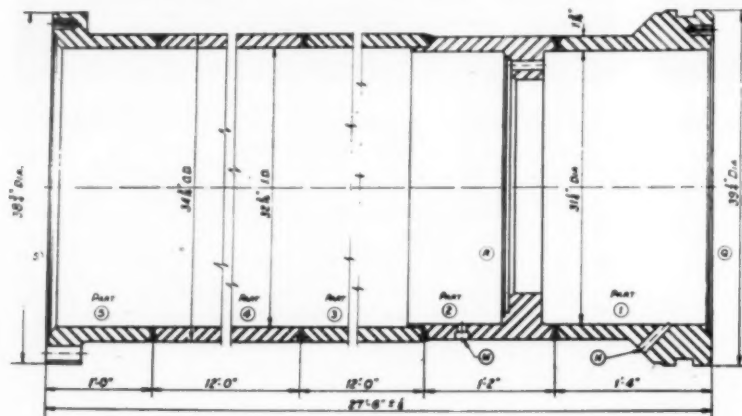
DRAWING OF FABRICATED STAINLESS-STEEL RETORT
